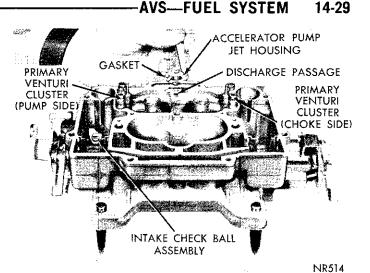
Removing or Installing Accelerator Pump Jet Housing
